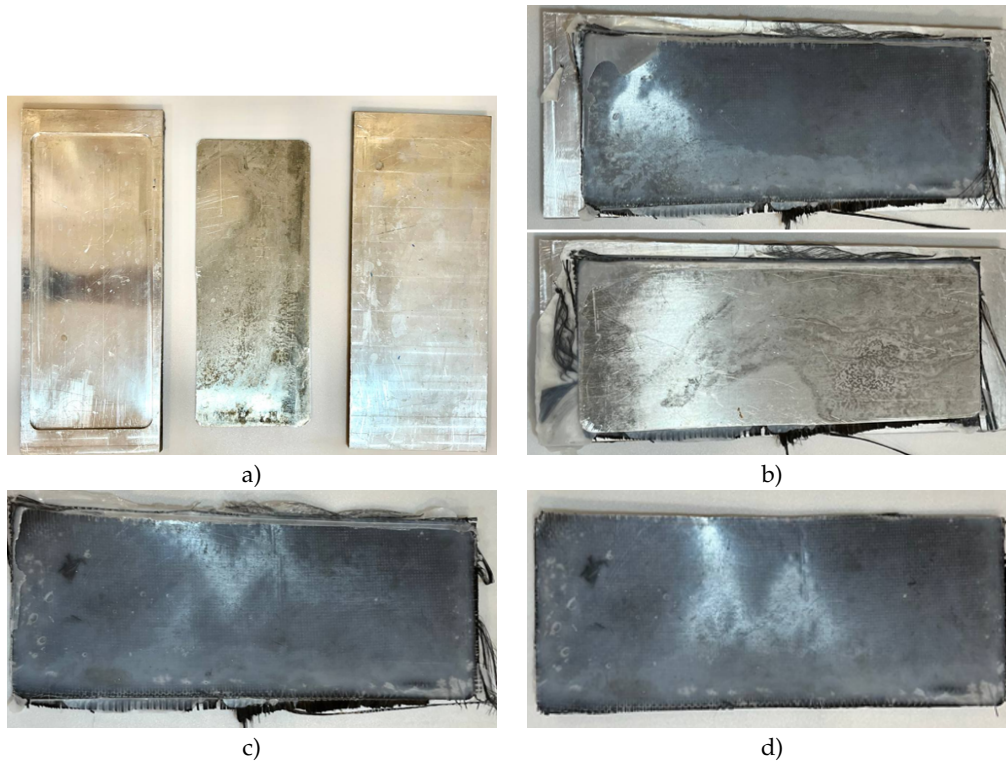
Production stages of WCFs and HDPE composite sheet: a) aluminum mold parts; b) composite materials inside the mold; c) and d) removal of the composite materials and trimming the edges of the pieces.
